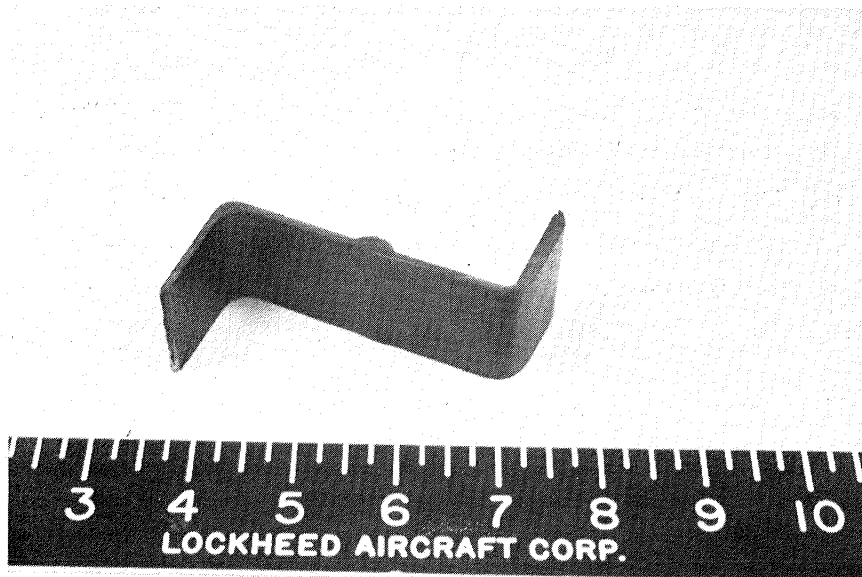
Concept "B" Truss Rib Cap with Bead Molded in Cavity
